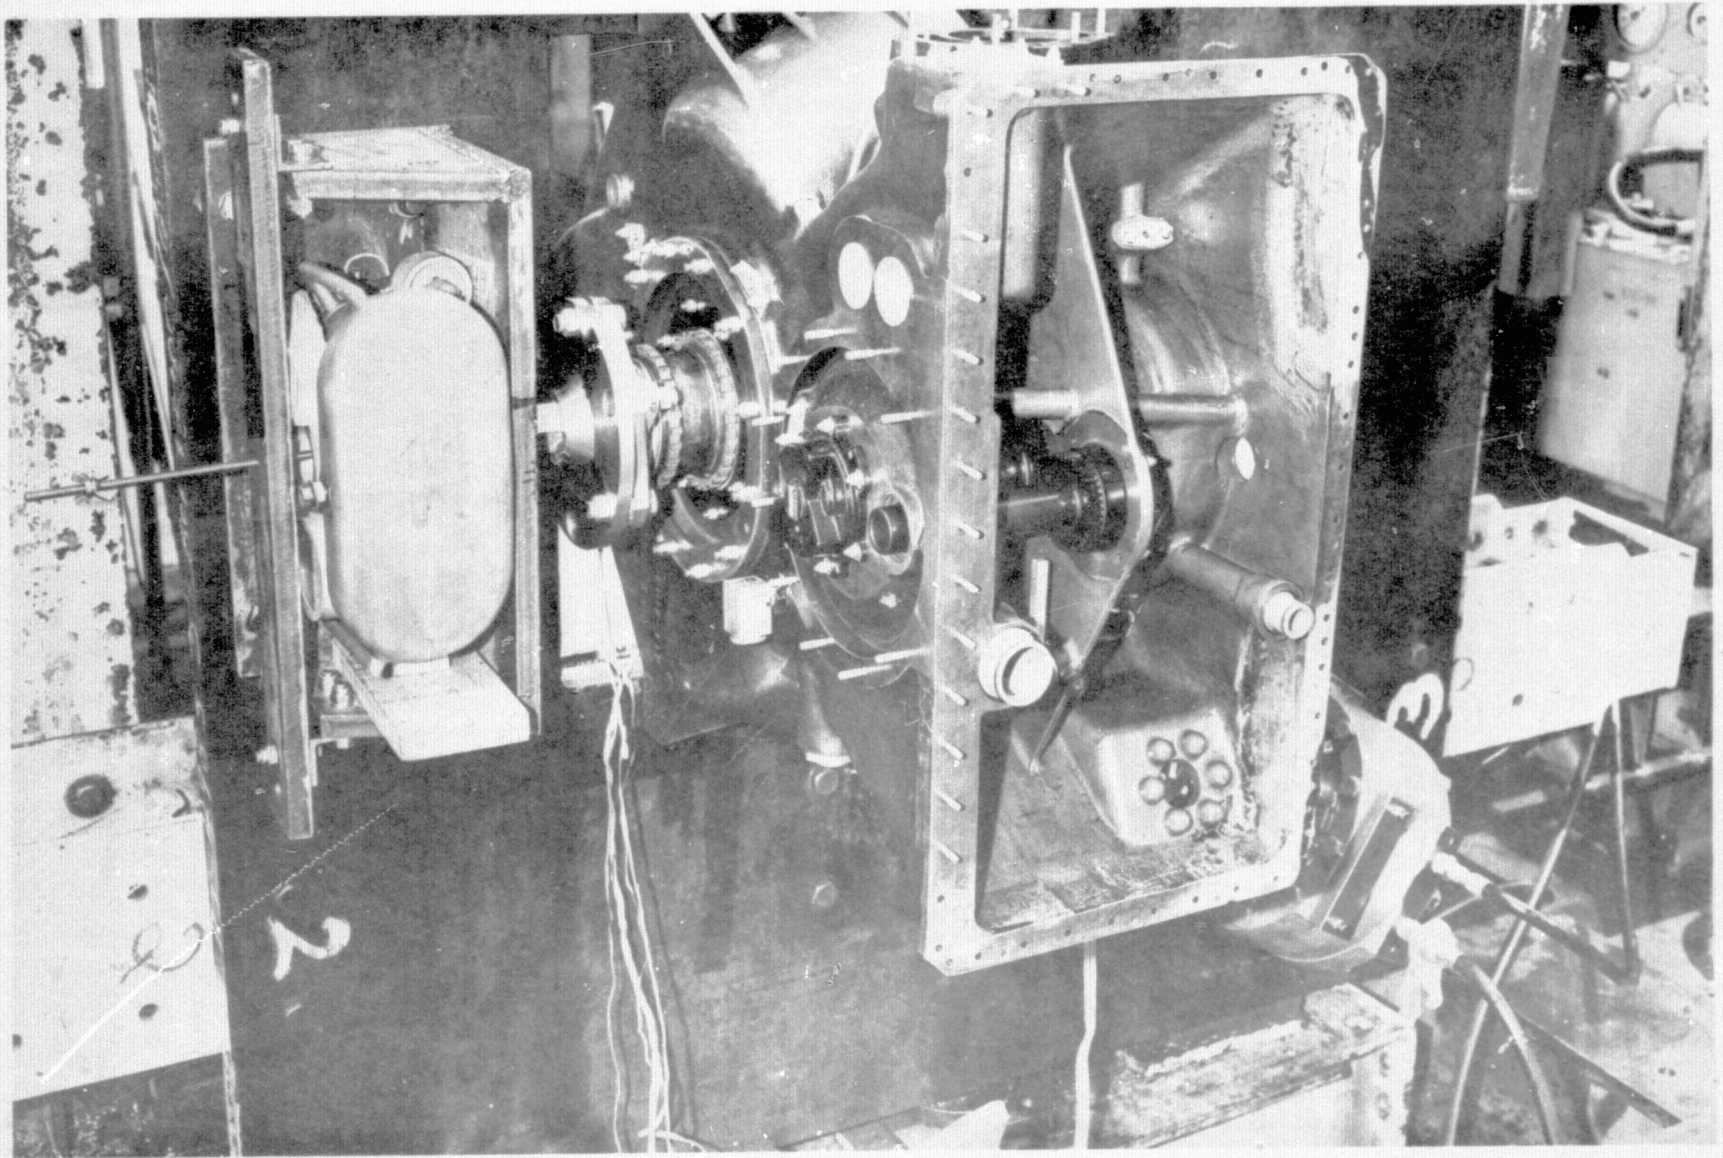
HLH BEVEL GEARING TORSIONAL FIXTURE
